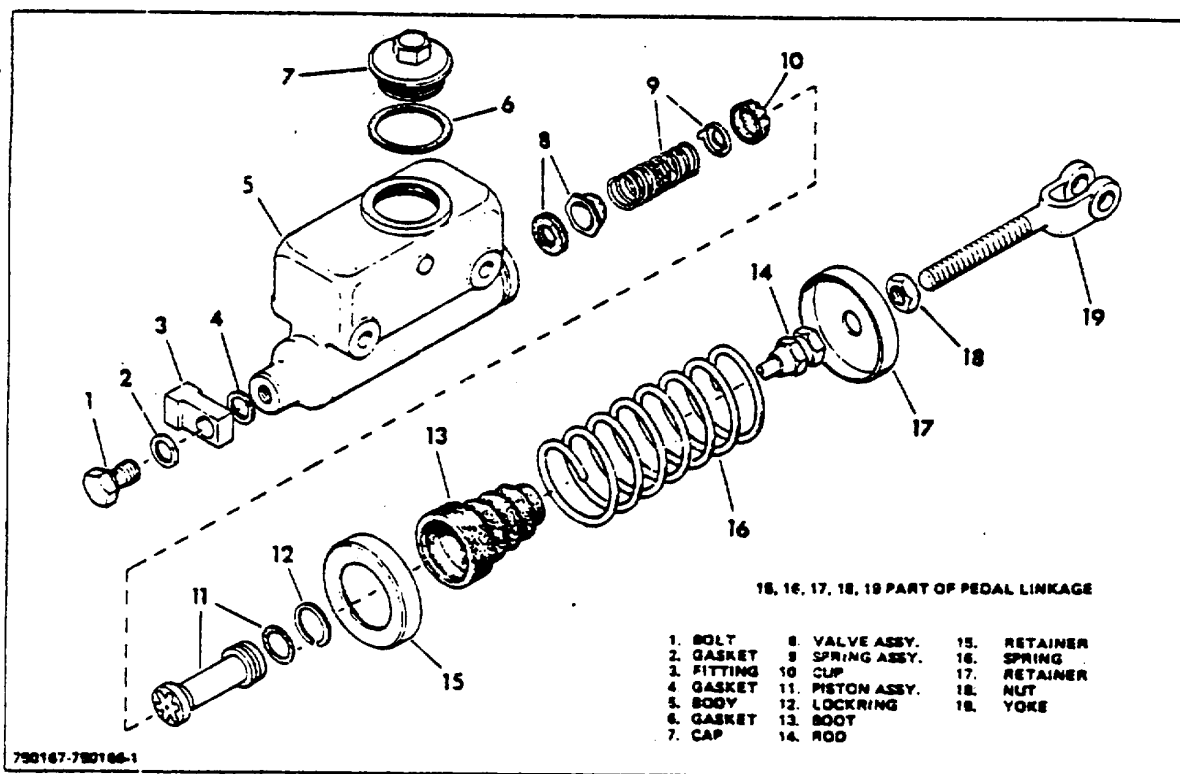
Master Cylinder Assembly And Yoke With Pedal Return Spring And Retainers
